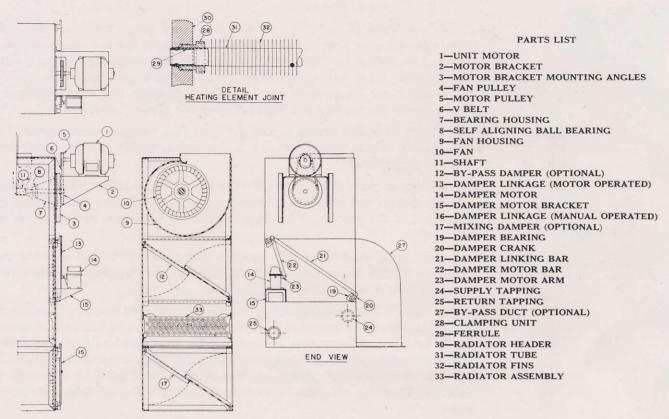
Typical Construction Details Type "R" Unit Heaters.
